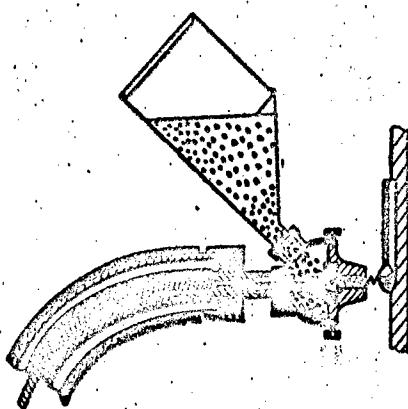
Welding System with a DShM-3 Adapter in Vertical Position.
